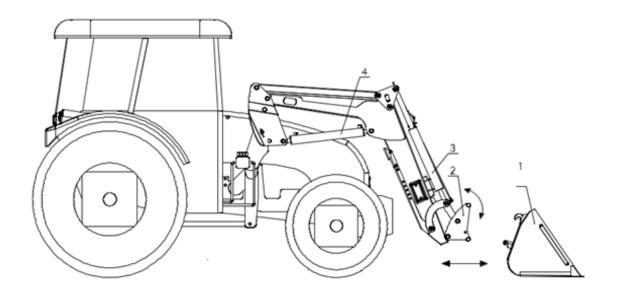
Mechanical tool installation 1 – work tool, 2 – coupling frame, 3 – arm cylinder, 4 – boom cylinder.
